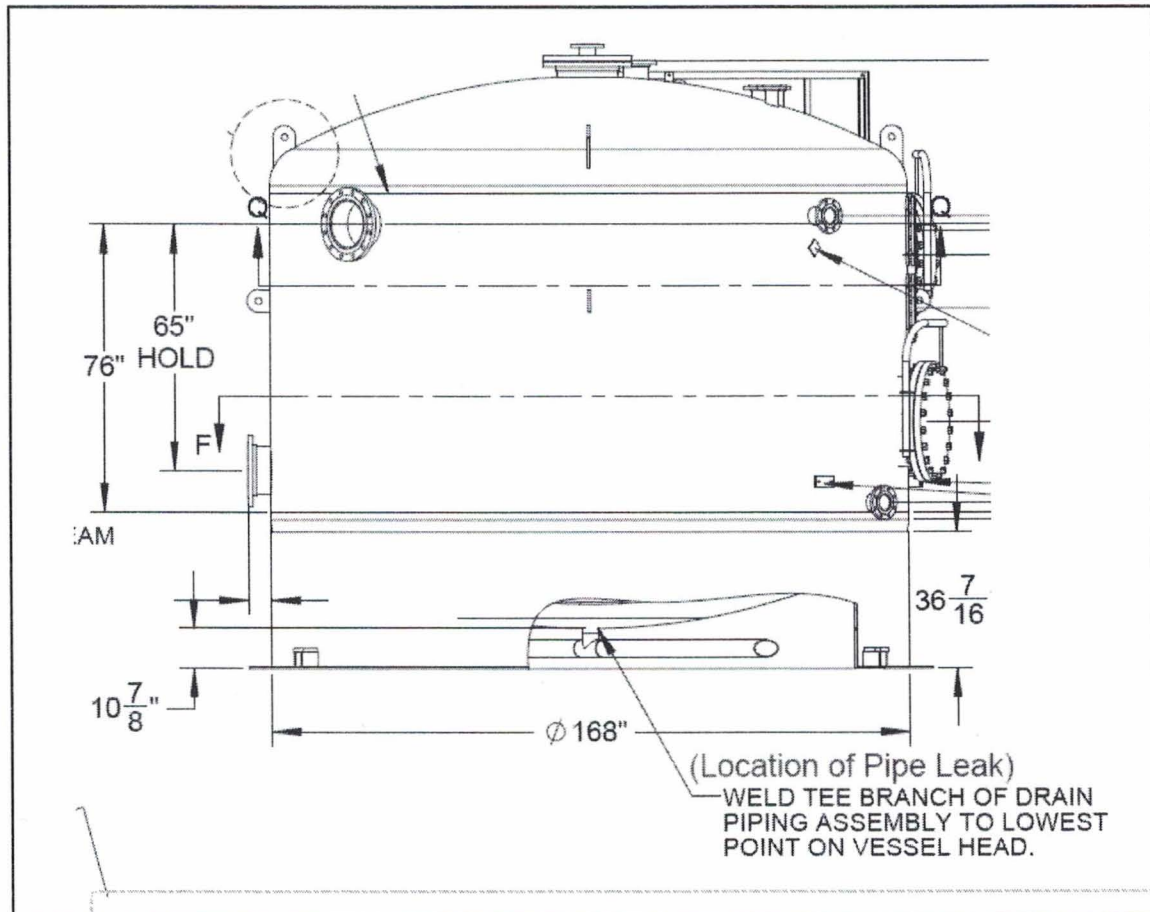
WRT Uranium Removal System, Grand Island NE
